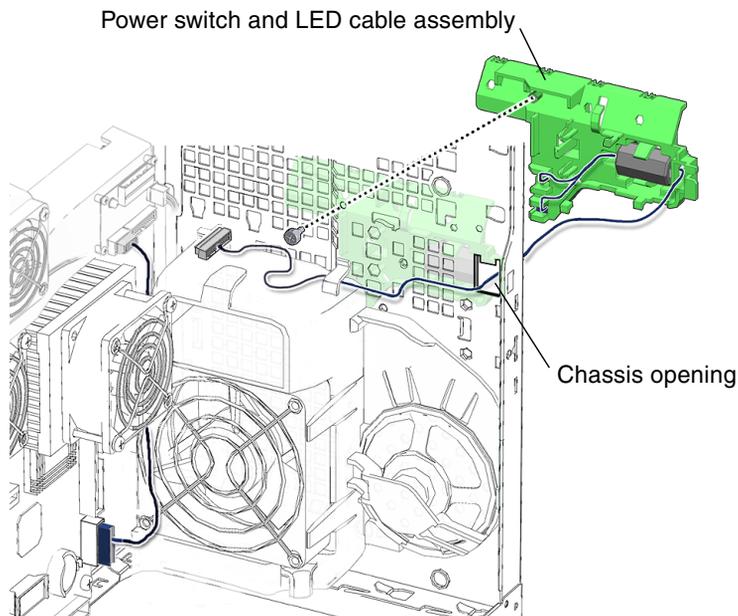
Releasing the Power Switch and LED Cable Assembly
